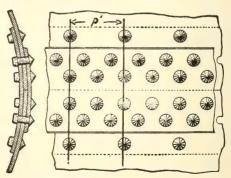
TRIPLE RIVETED BUTT-JOINT.
